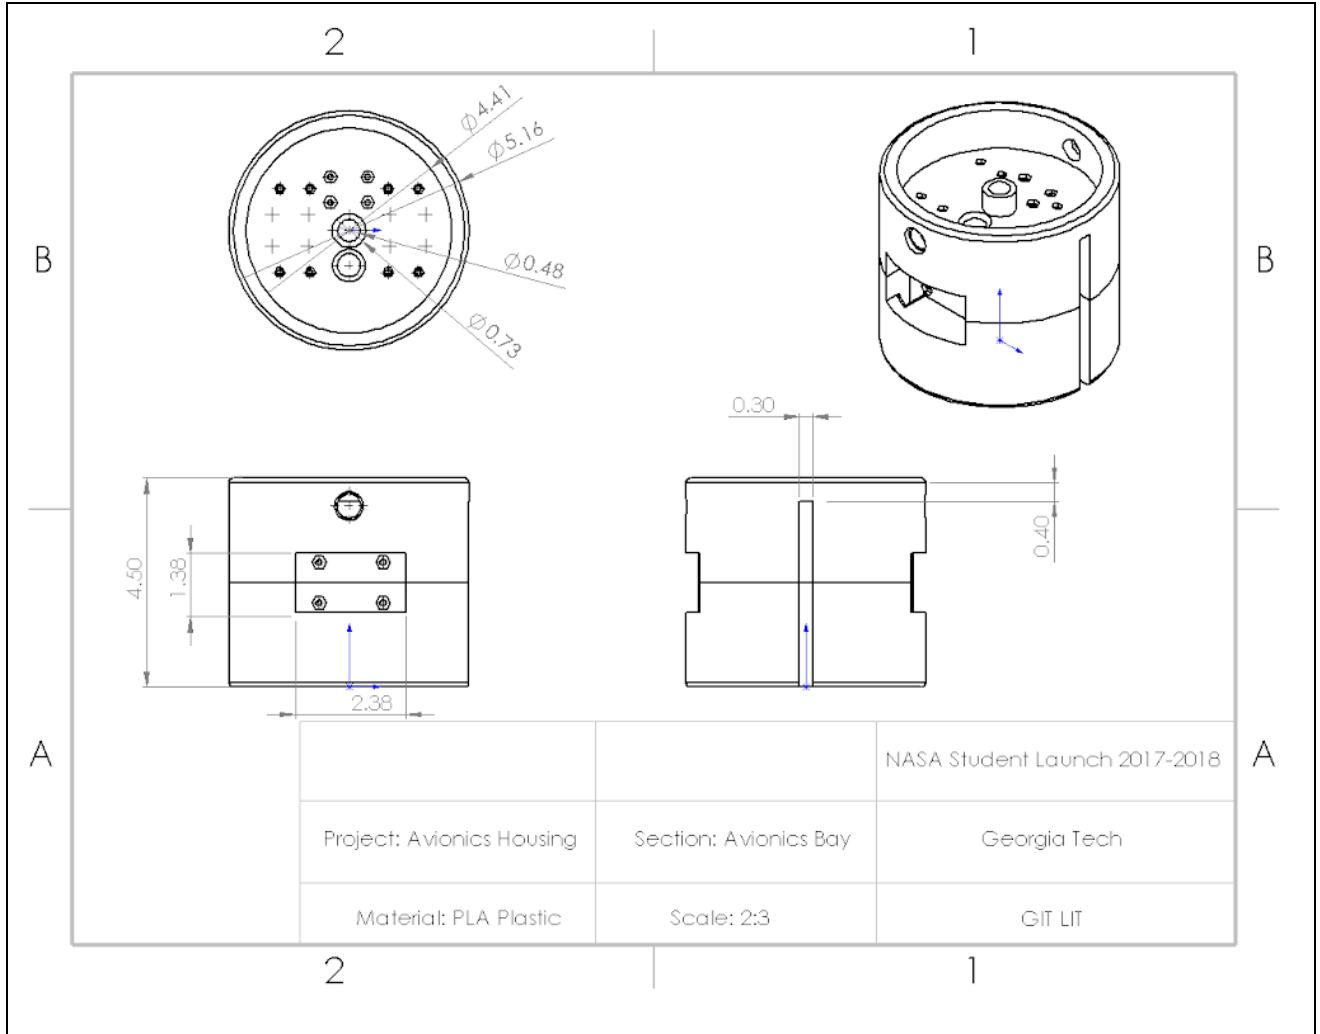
Avionics Section Avionics Housing Drawing
